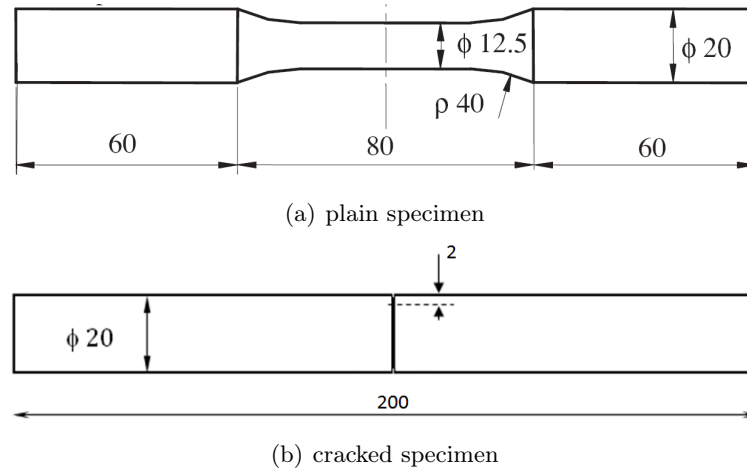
geometry of a) plain cylinder specimens and b) cracked specimens.
